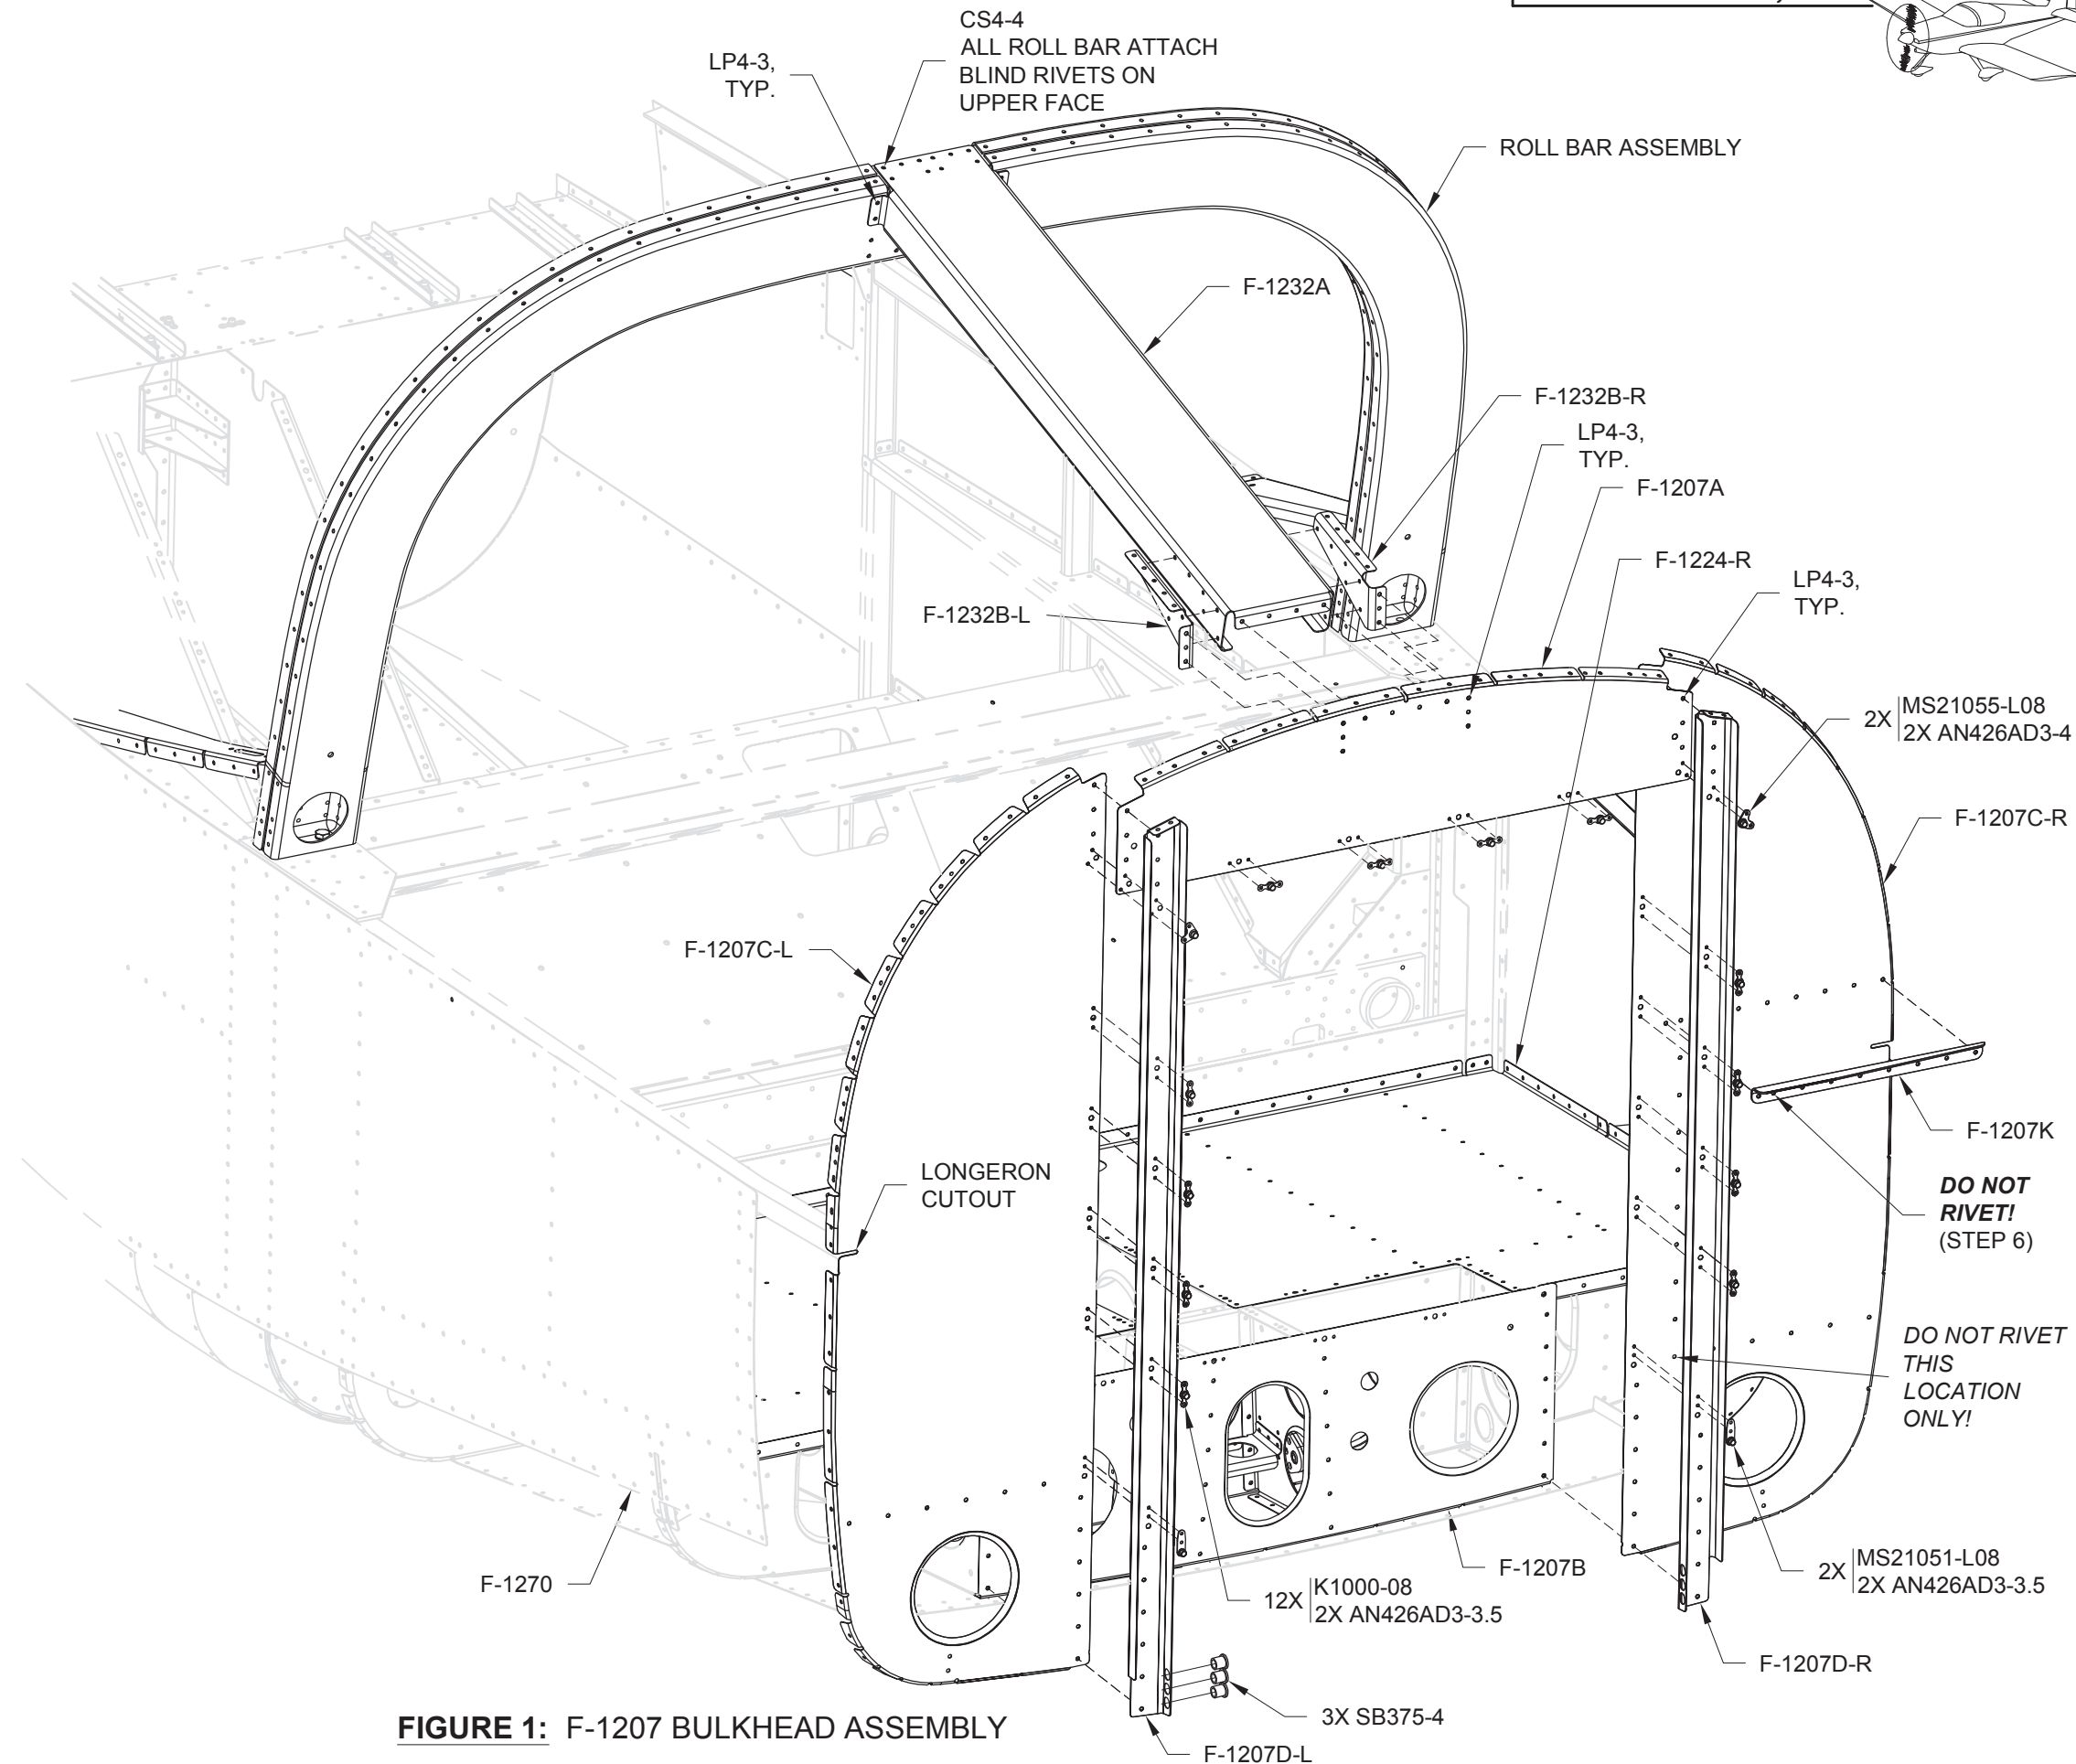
F-1207 BULKHEAD ASSEMBLY
